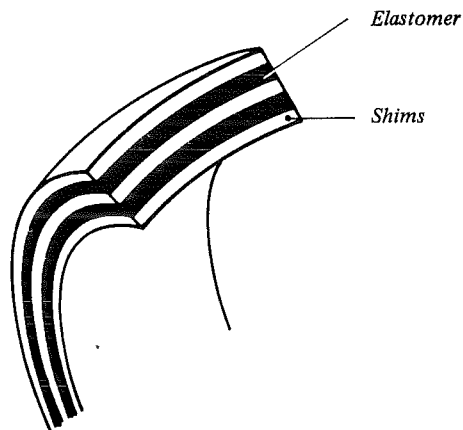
FLEXIBLE BEARING - PRINCIPLE
